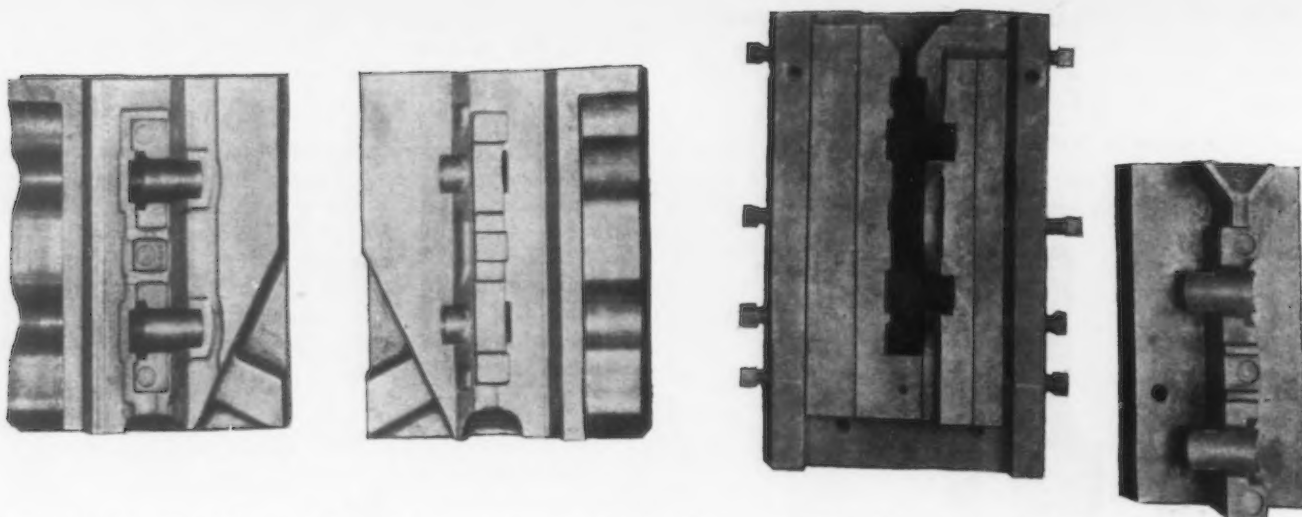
Forging Dies (Left) and Trimming Tools, the Latter for Hot Trimming, with the Gate Showing at Upper End
